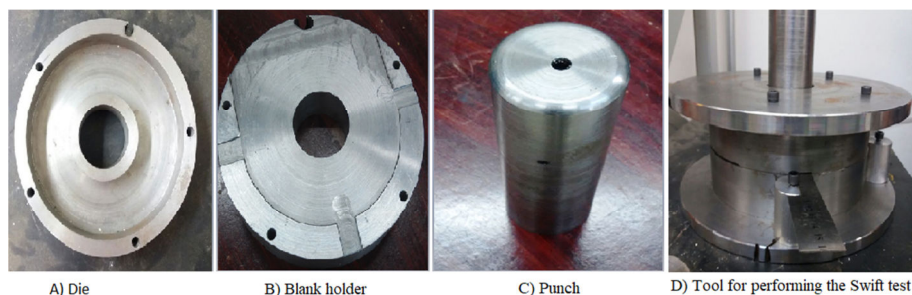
A) Die B) Blank holder C) Punch D) Tool for performing the Swift test
